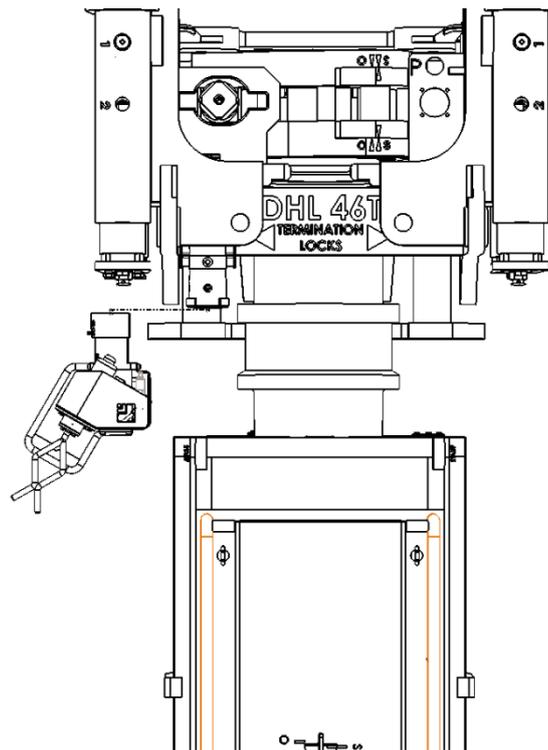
Position before connection to Installation Tool, typical (view above)
